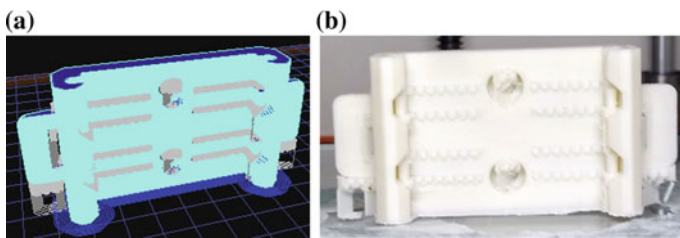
a Tool path for iteration 3. b fabricated fixture-iteration 3
